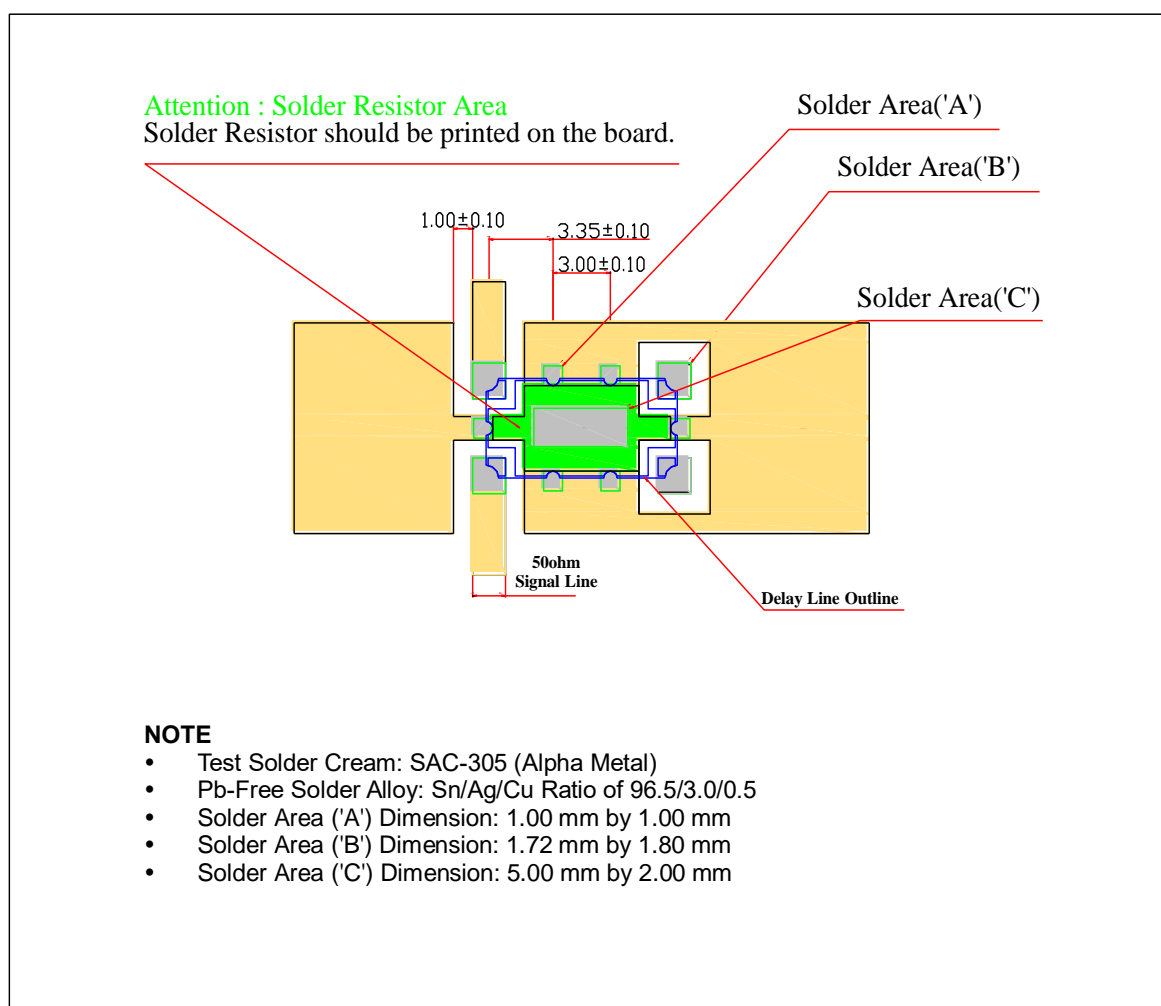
Recommended PCB Layout and Solder Mask Pattern
